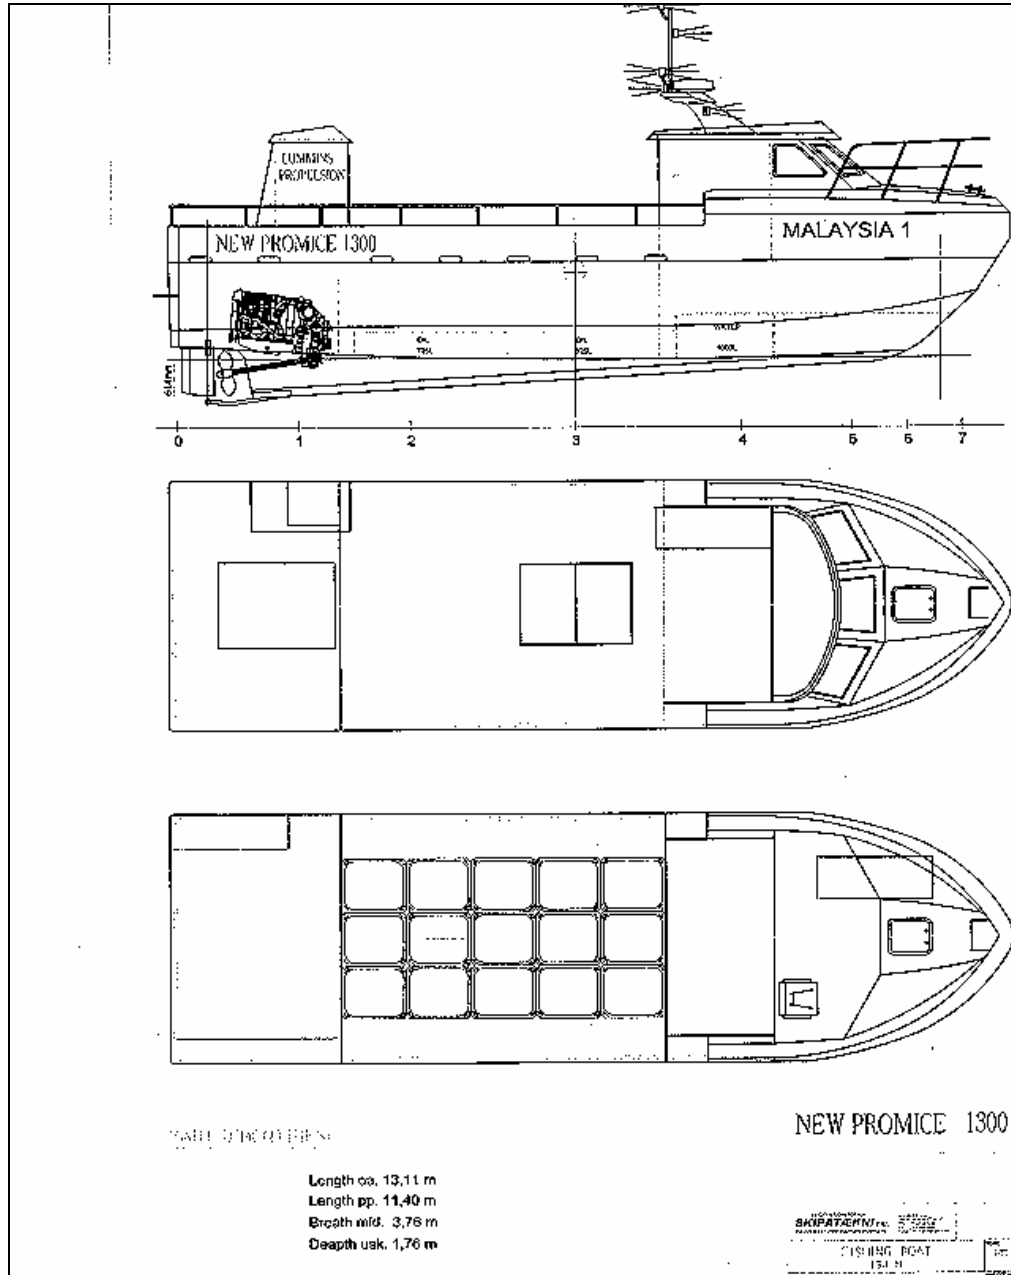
Drawing plans of conceptual design of 13.11 m FRP boat.
